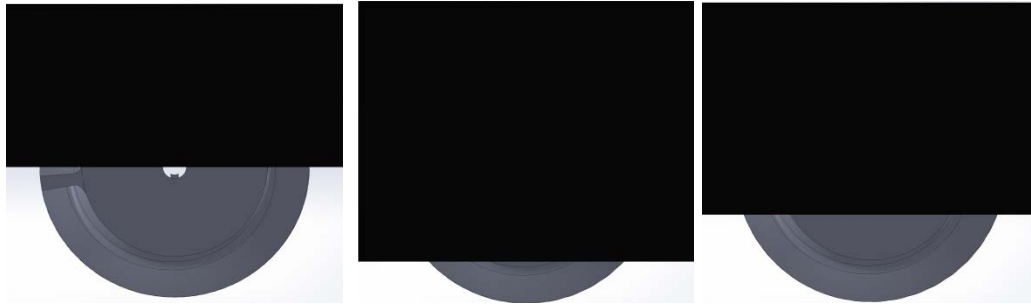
Three tested screw depths below test platform (1, 2, 3 from left to right)
